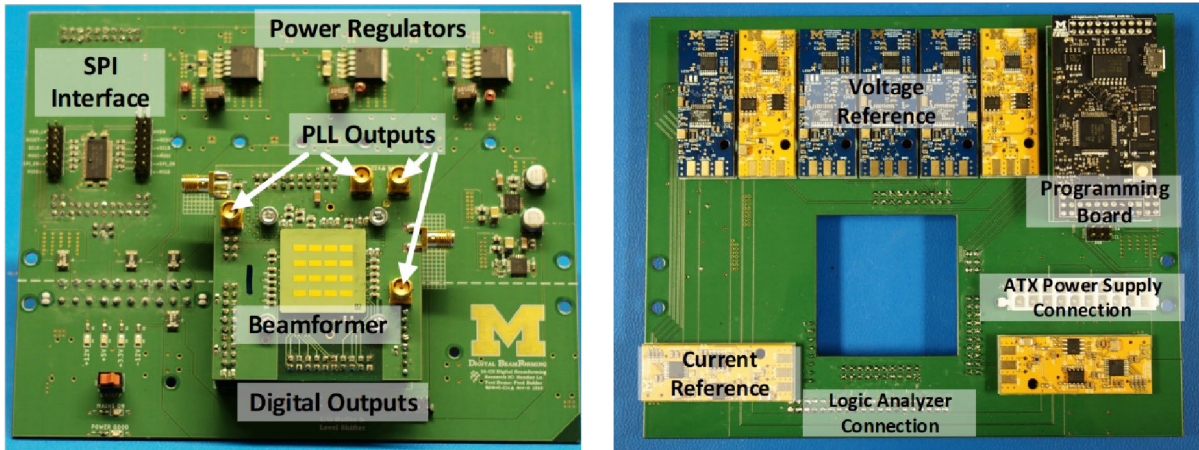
Assembled Beamformer Mounted on PCB Stackup
